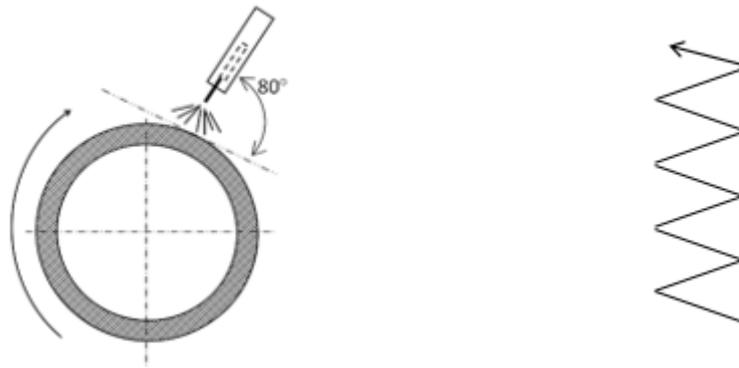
a the welding direction and dip angle of the cover layer Figure 5-b arc oscillating mode of cover surface
